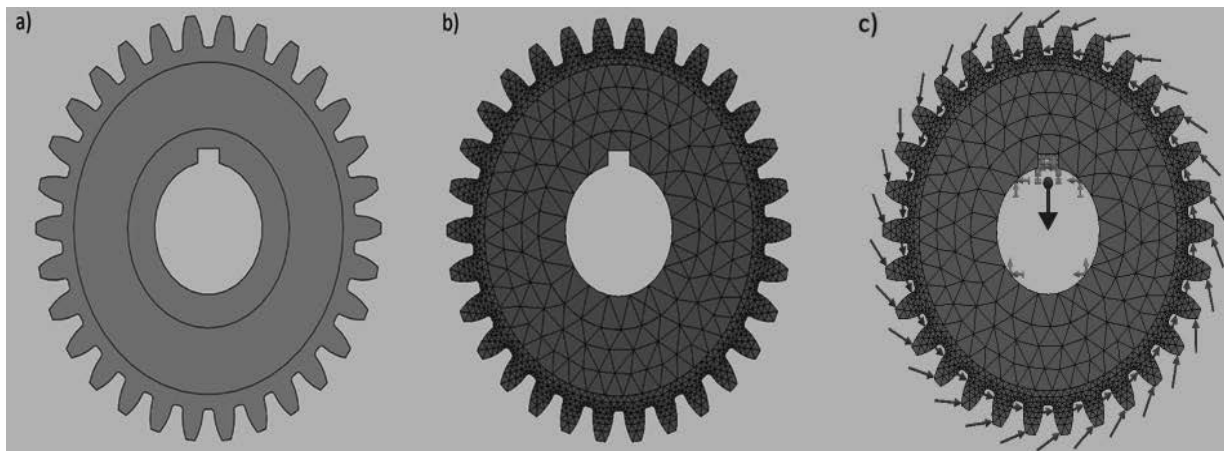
CAD model of gear wheel (a); with finite element mesh superimposed (b); with finite element mesh superimposed, force direction visible and geometry immobilized (c)
